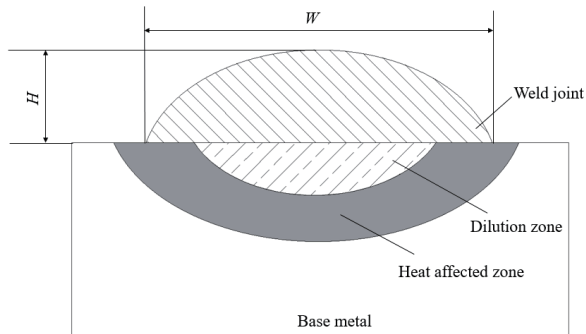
Schematic cross-section diagram of the weld joint.
